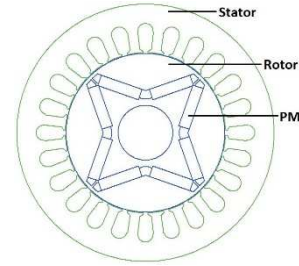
IPMSM inner rotor V-shaped embedded PM.
